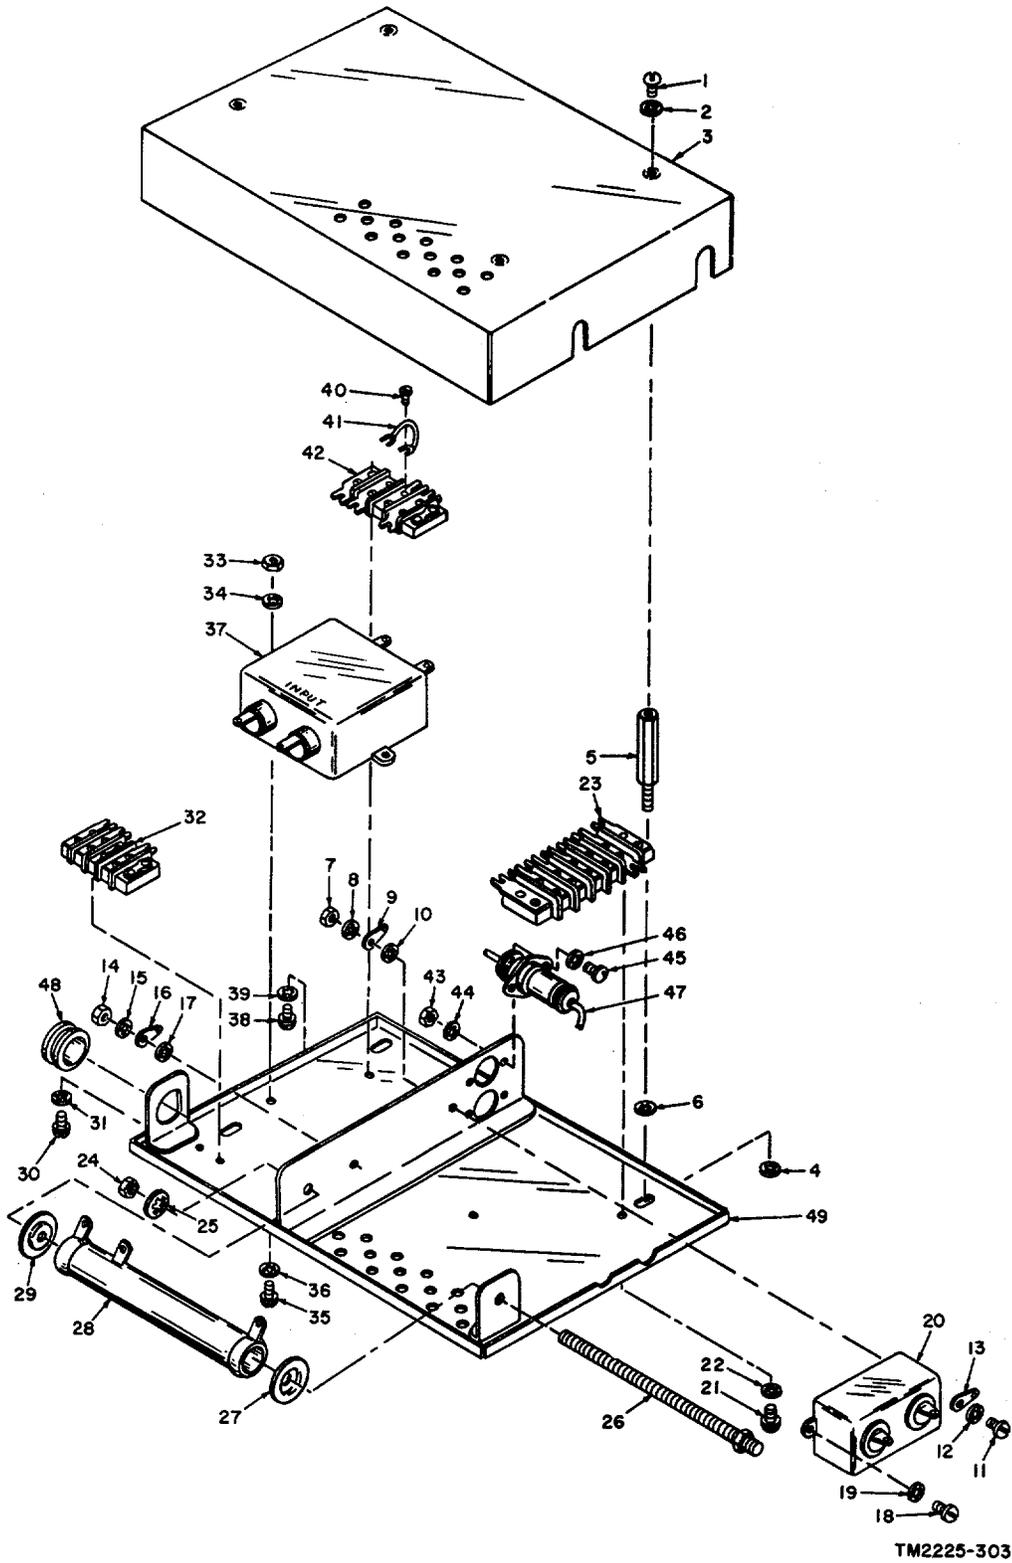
Motor suppression filter unit, exploded view (TT-76/GGC).
